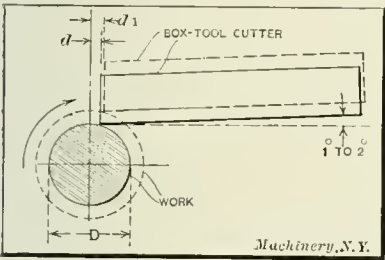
Adjusting a Tangent Cutter for Turning Different Diameters
